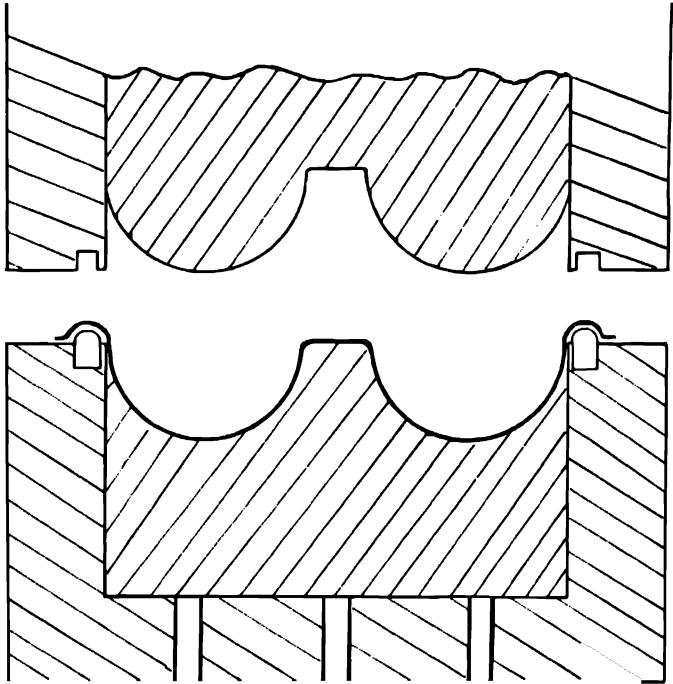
Method by which motor-car wings are drawn showing beading.
